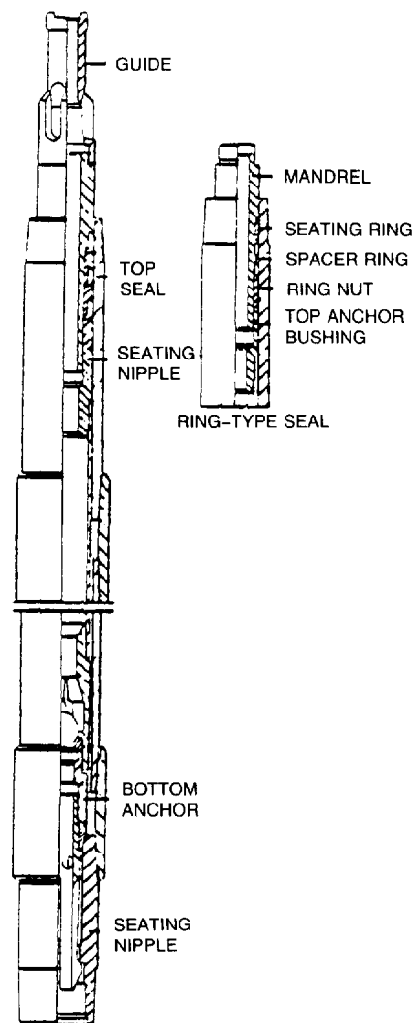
Top seal and bottom seating for stationary-barrel rod pumps.
